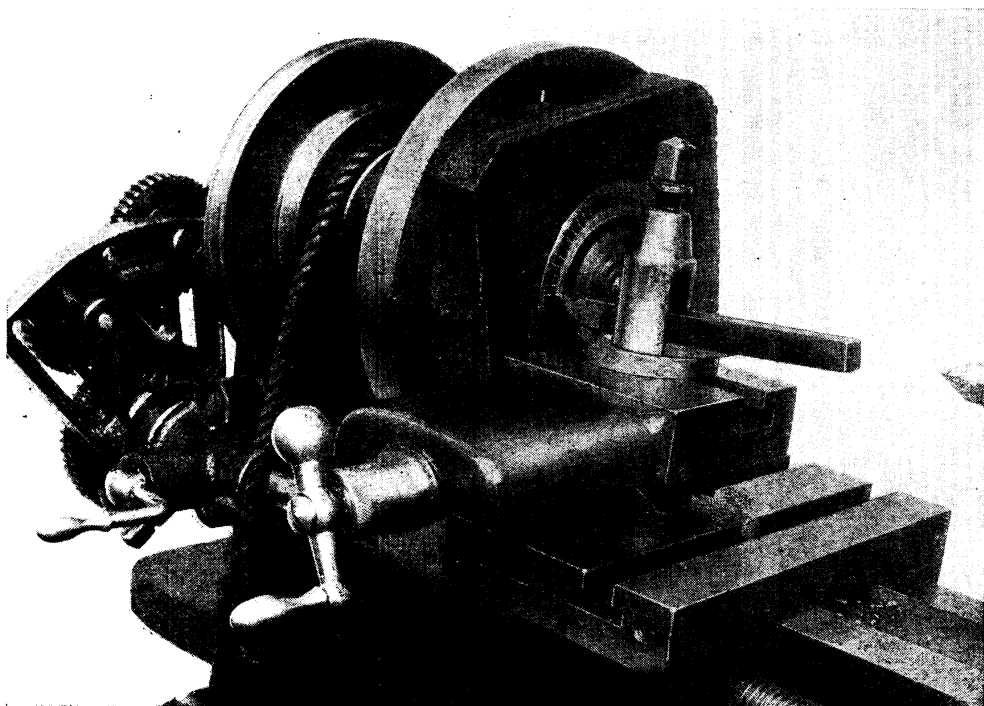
Condenser dials may be calibrated by hand in this way. The wooden block to which the dial is attached is screwed to the face plate of the lathe. Note how the tool is disposed in the tool holder in the top slide of the slide rest
